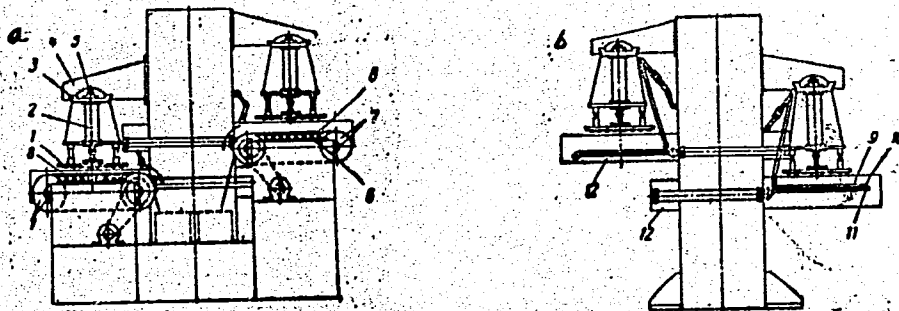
1 - Vacuum cartridge; 2 - cylinder; 3 - carriage; 4 - support; 5 - screw couple; 6 - spindle magazine; 7 - conveyer; 8 - conveyer belt of specified length; 9 - middle part of die; 10 - projections on the middle section; 11 - catches; 12 - guides of the press.
